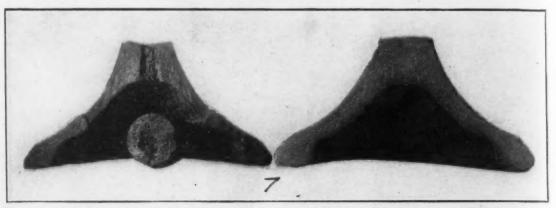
High tungsten steel valve showing a spongy condition after deep-etching. X 0.9.
